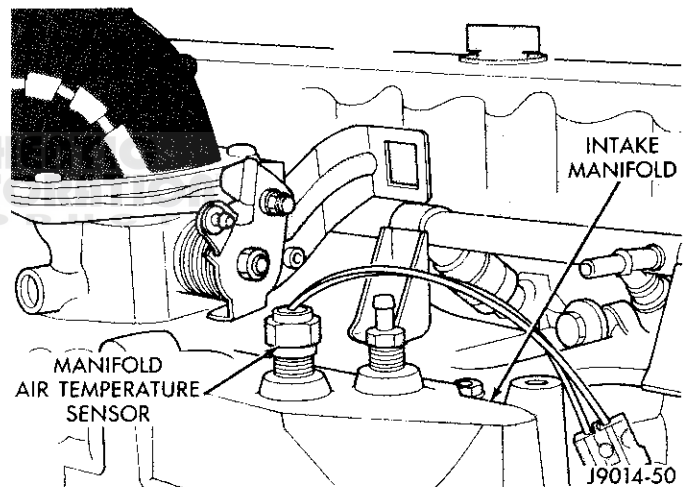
Manifold Air Temperature Sensor Removal/Installation
